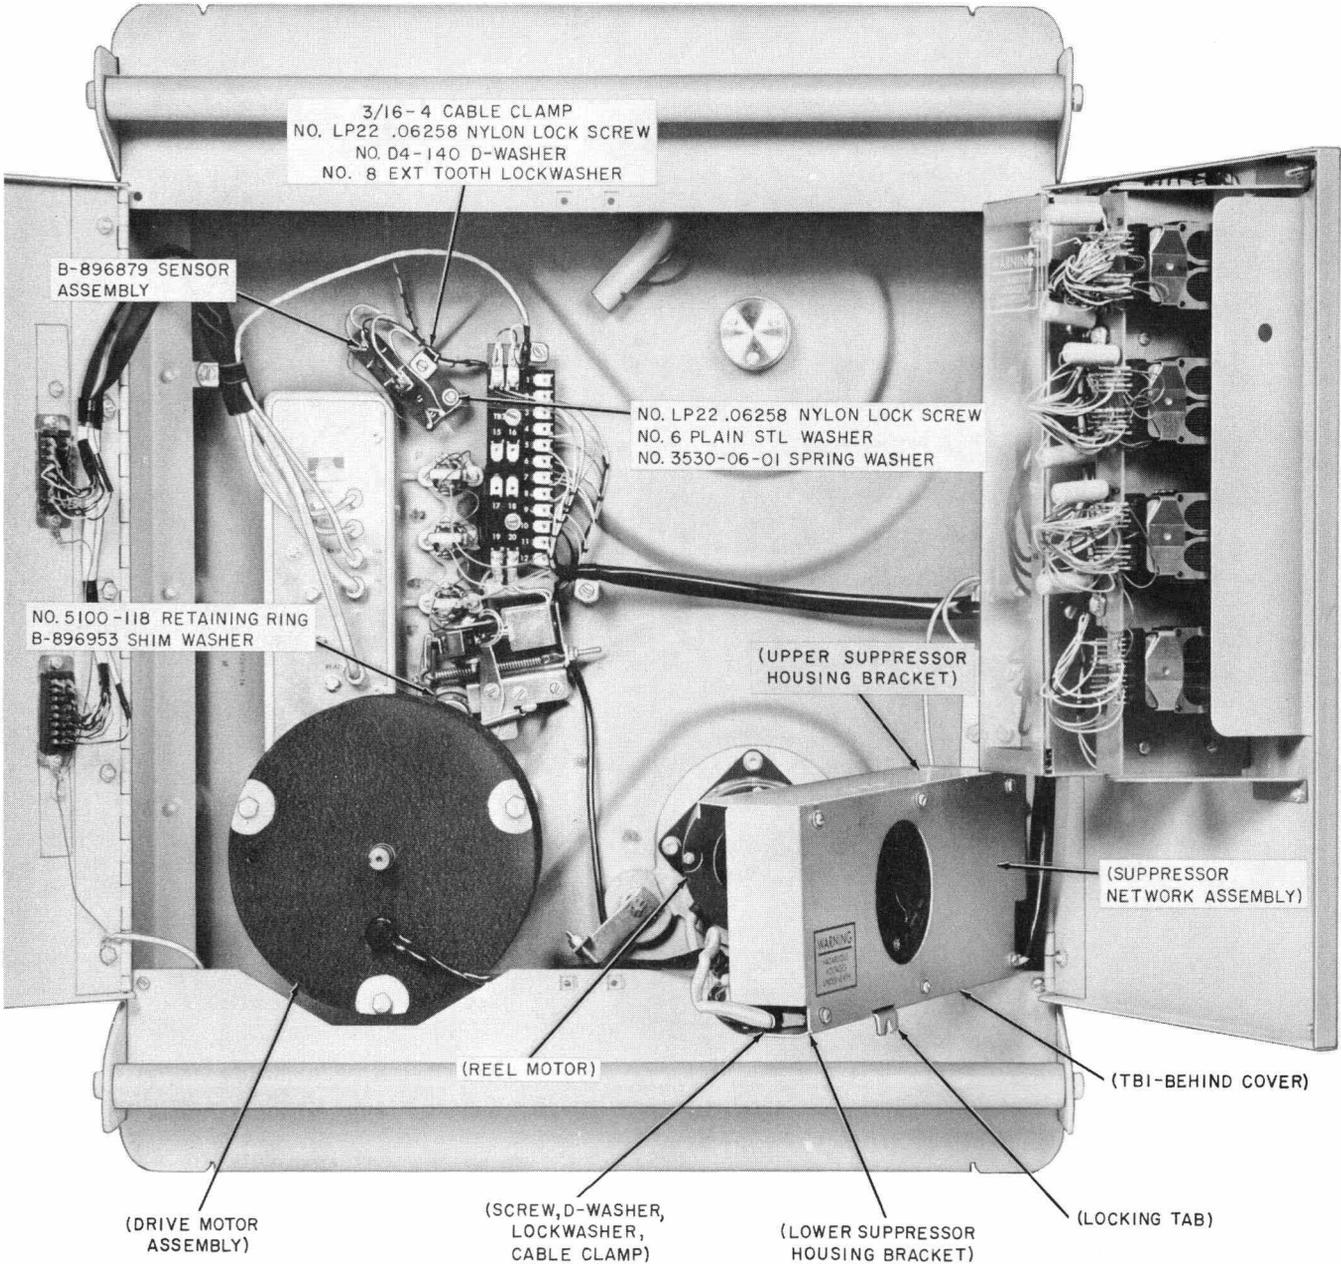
KS-19125, List 2 Recorder Assembly — Rear Internal View
